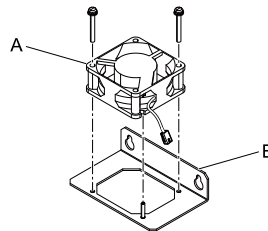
Remove the Circuit Board Cooling Fan Units
